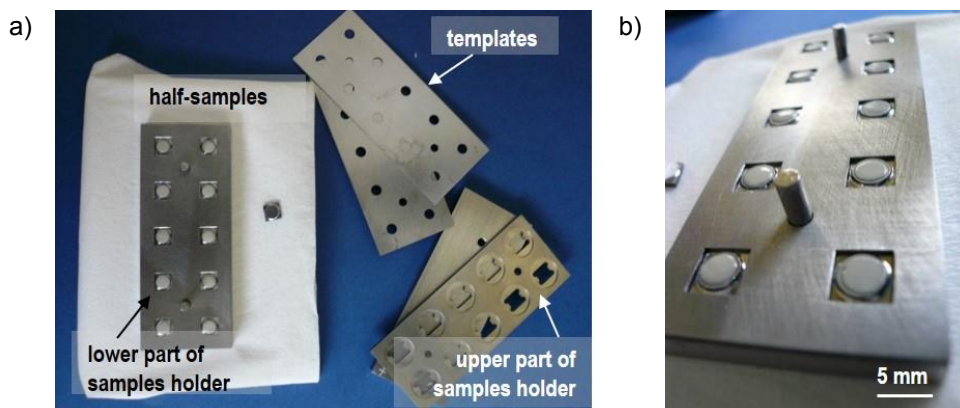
Samples holder and printed miniature hourglass shaped samples. a) templates, samples holder and joining pieces; b) lower part of the samples holder with printed half-samples
